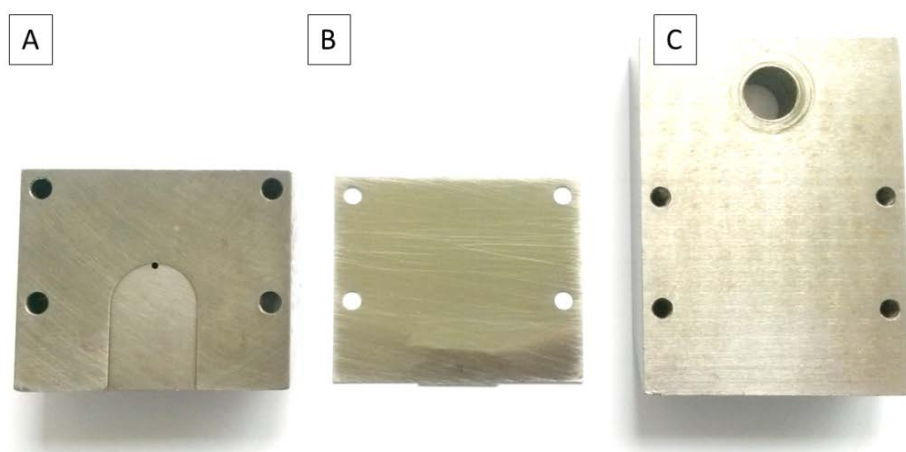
Example of a 3 piece 13 mm width coating head. A) The front part of the head with the milled groove. B) The meniscus guide insert directing the flow at the head outlet. C) The slot-die head back piece.
